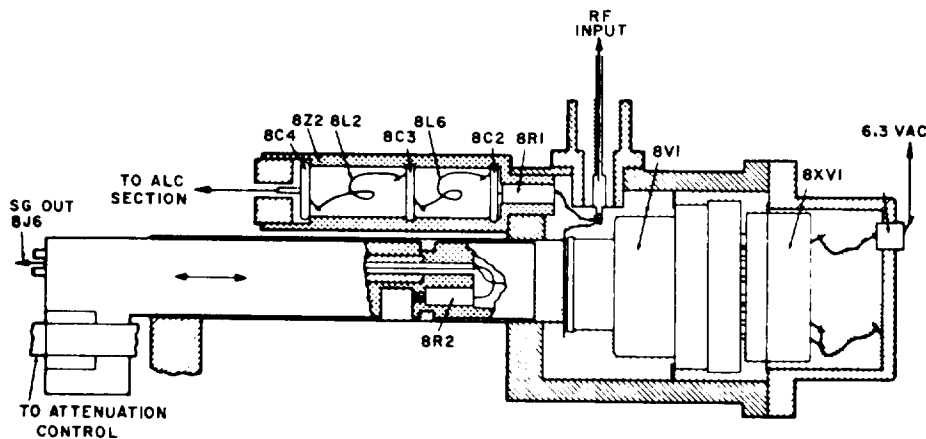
ALC/Attenuator Assembly 8A2, Cutaway Drawing
